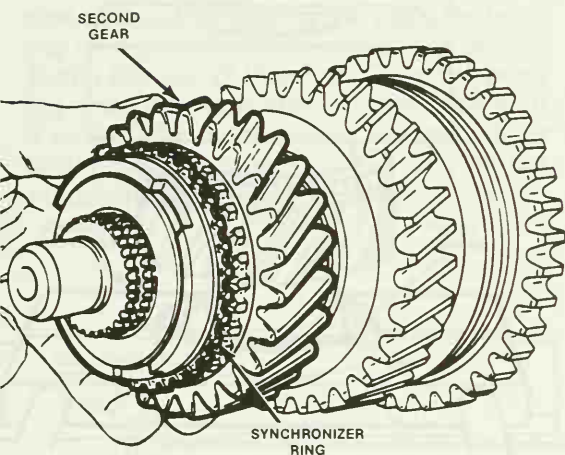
Installing second gear on mainshaft or output shaft. (American Motors Corporation)
